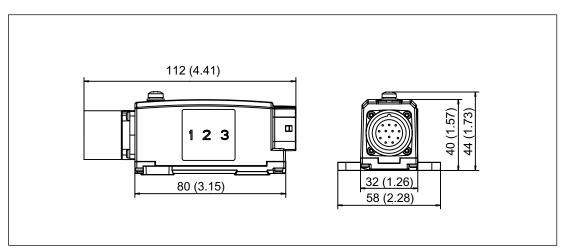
Dimension drawing SME25, Order number 6SL3055-0AA00-5HA3
